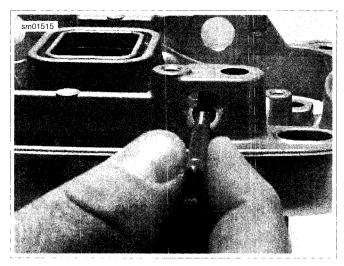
Measuring Rocker Arm Shaft Bore Diameter in Inner Rocker Cover
